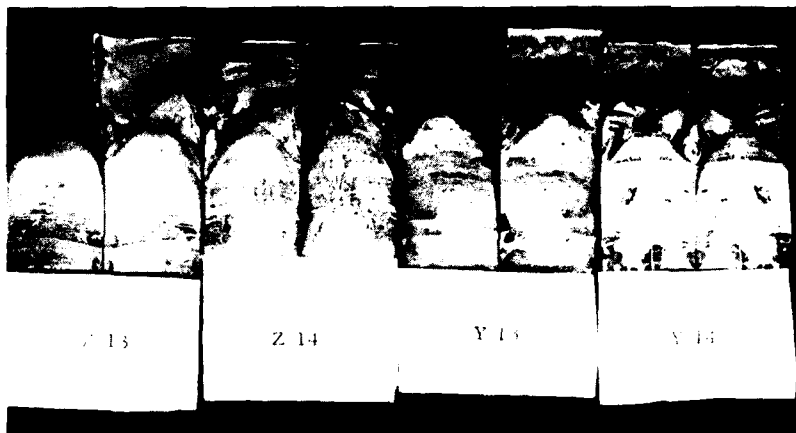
Fatigue crack growth specimen fracture surfaces, tested in lab air.
